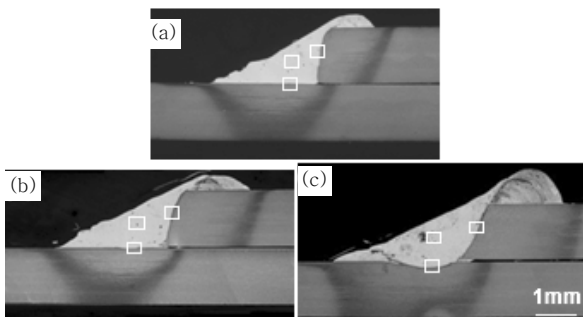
Cross sections of brazed joints. (a) 60A, (b) 70A, (c) 80A
